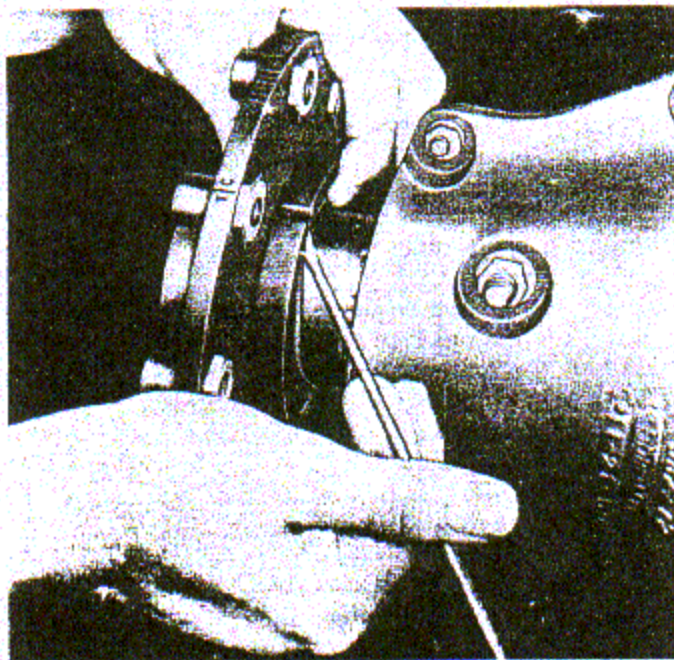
Installing Flanged Crankshaft Oil Seal Spring
